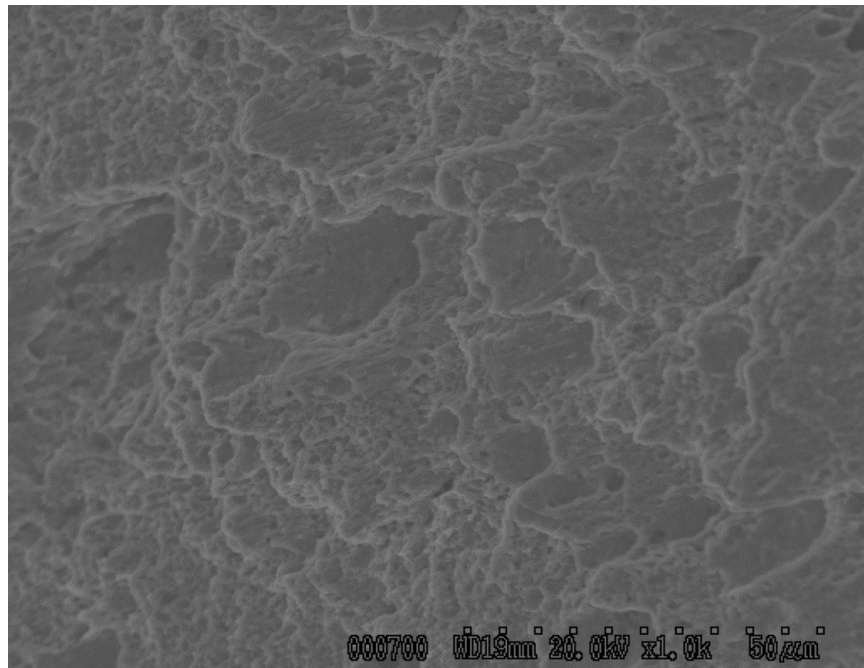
Scanning electron microscope fractograph of generator shaft fracture subsegment "B", Area 2.
